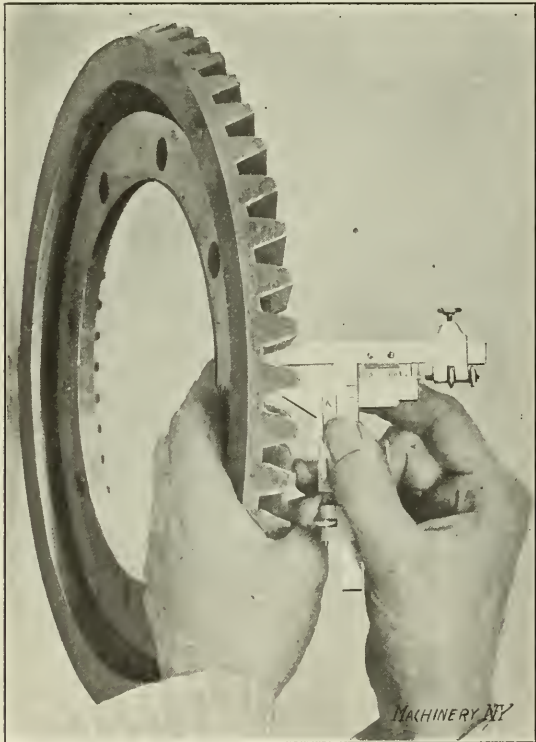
Brown & Sharpe Gear Tooth Caliper in Use measuring Tooth of Bevel Ring Gear
